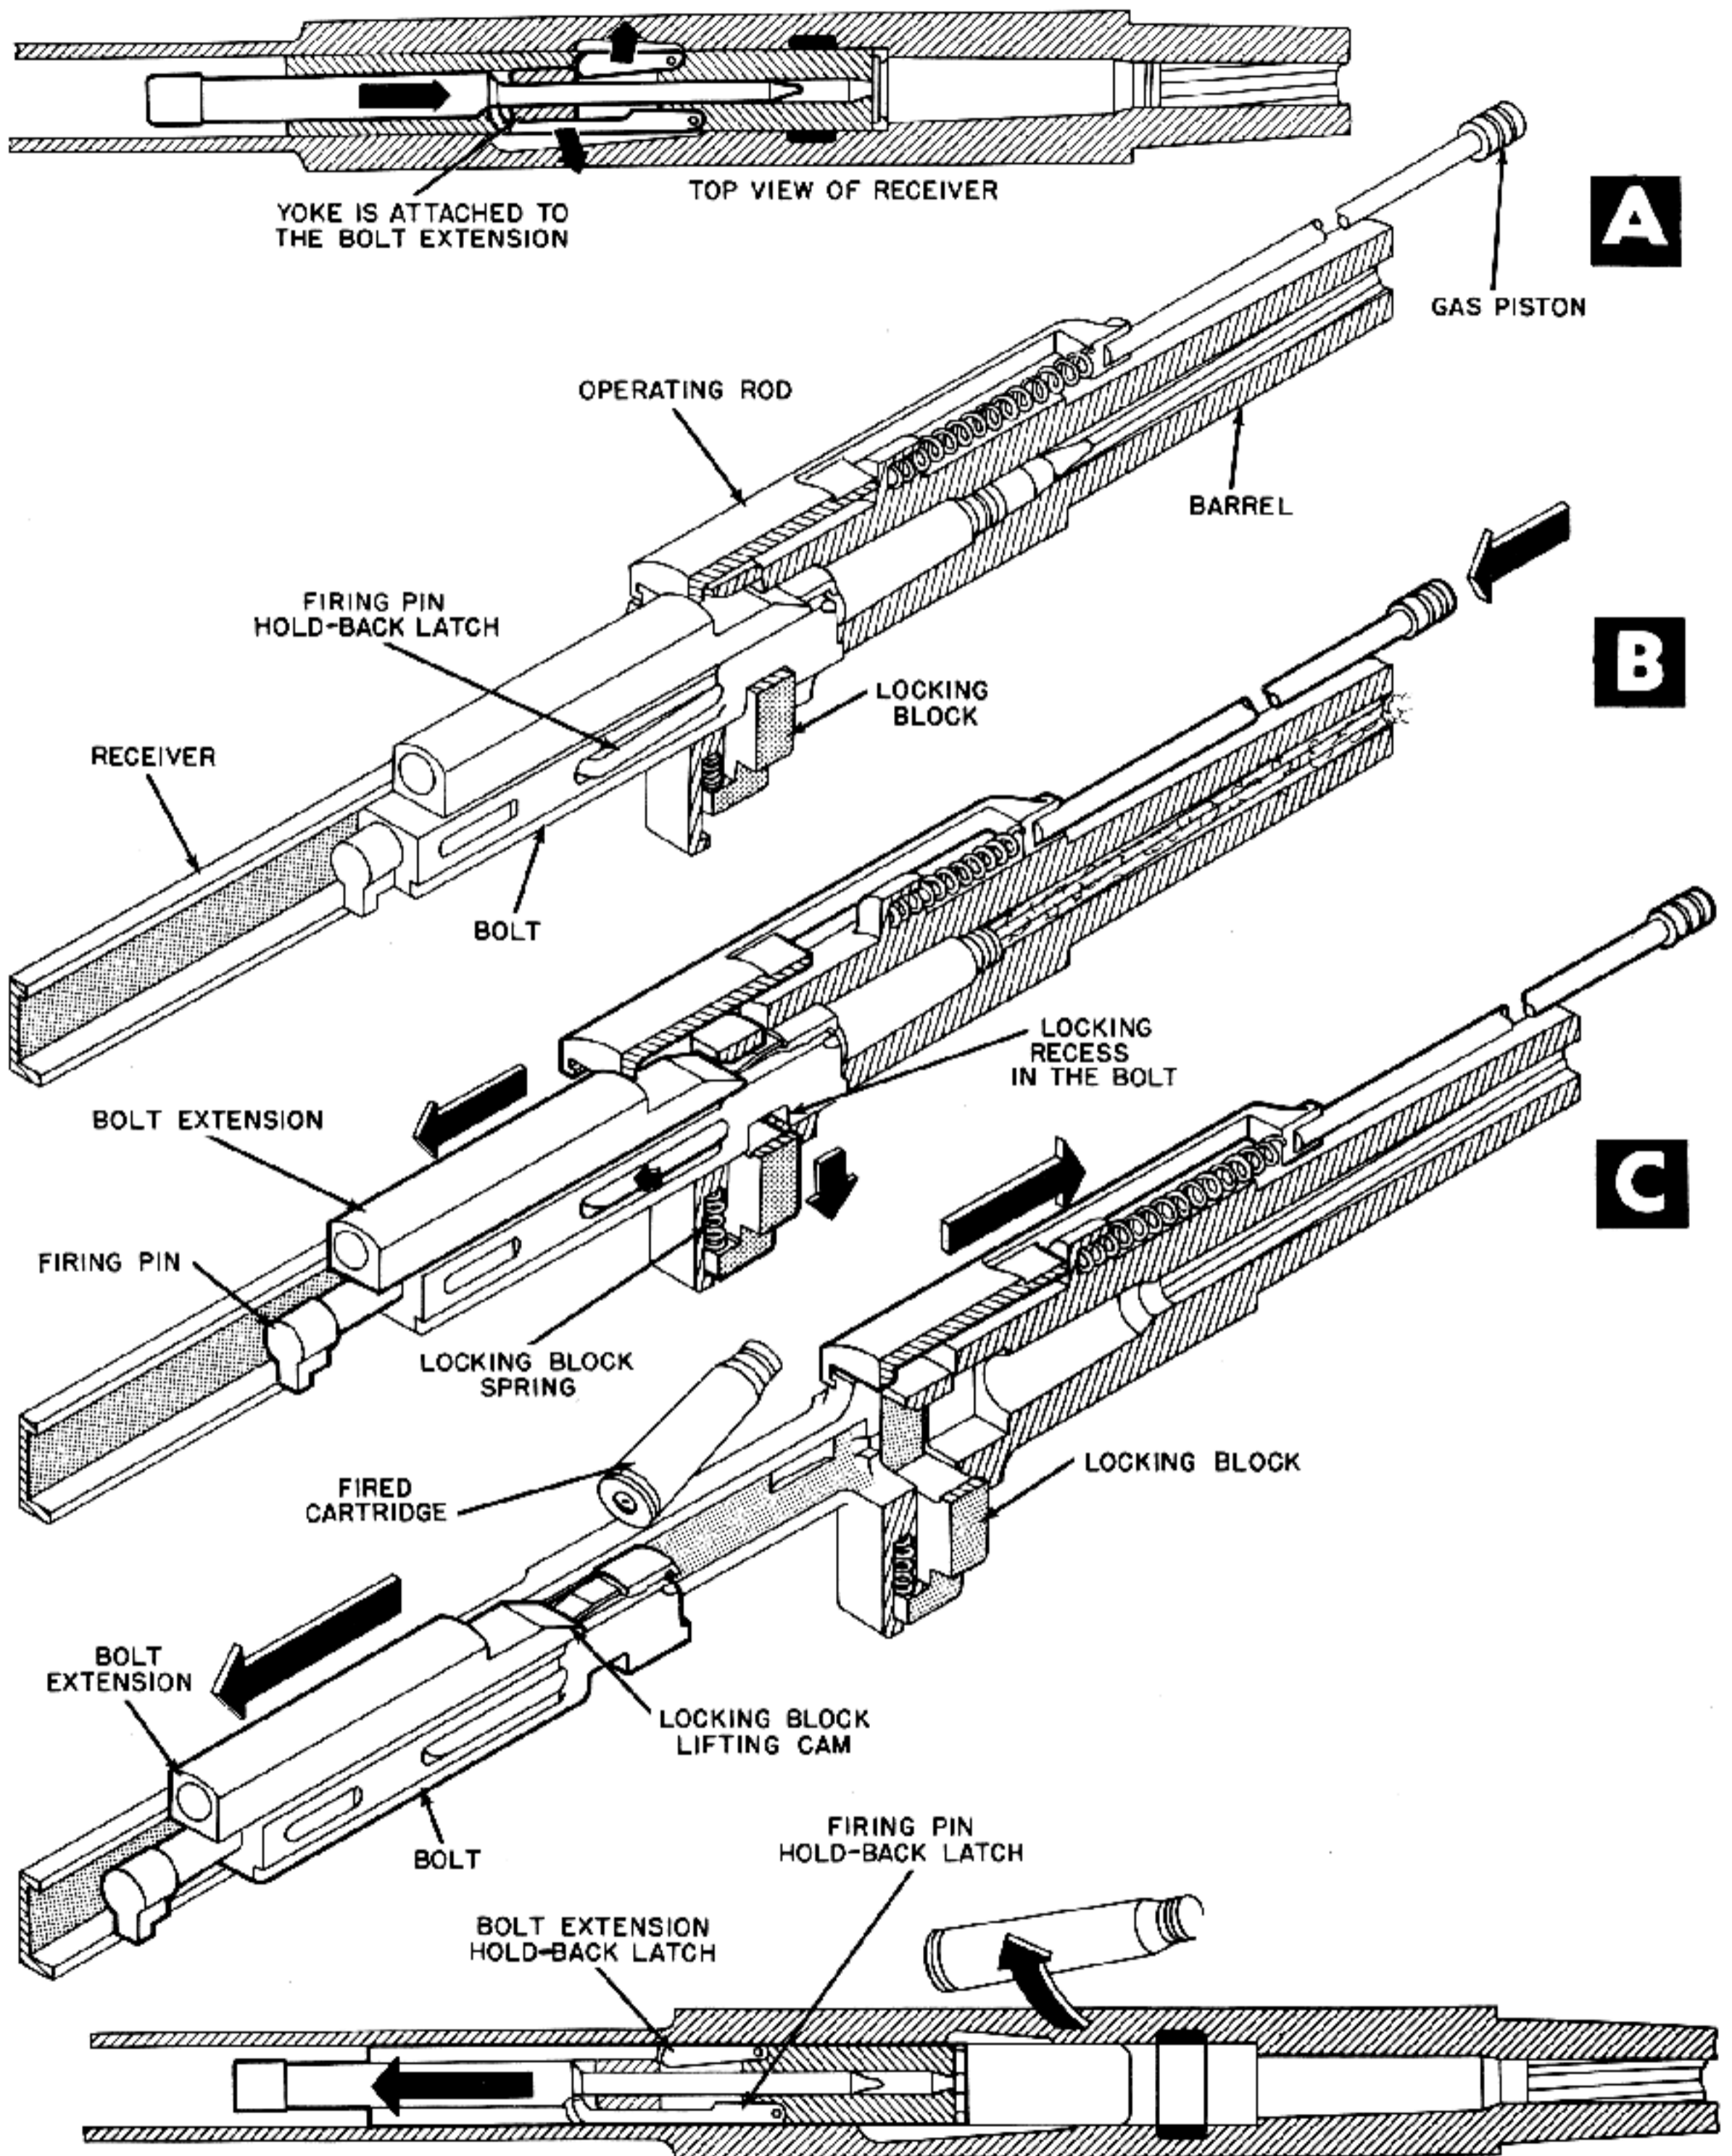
After Bolt Extension Recoils, Spring Forces Locking Block Free of the Bolt.
